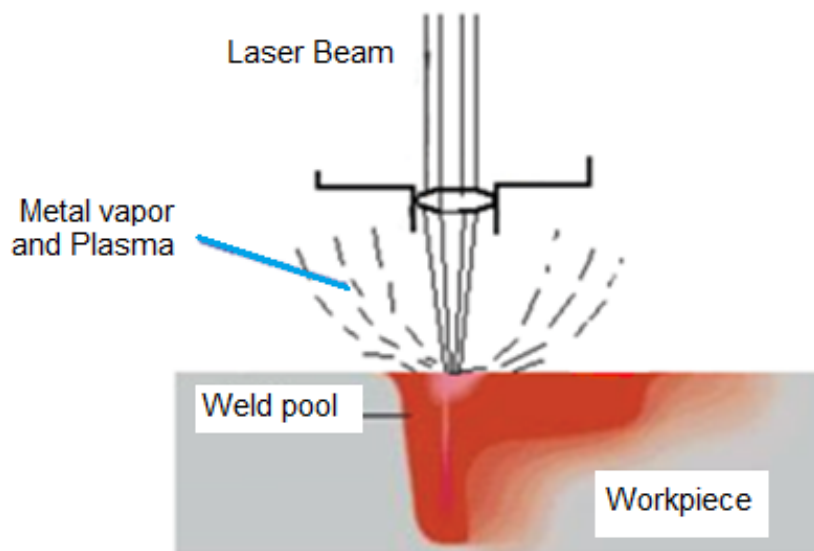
Simple laser welding process.⁽⁶⁾
